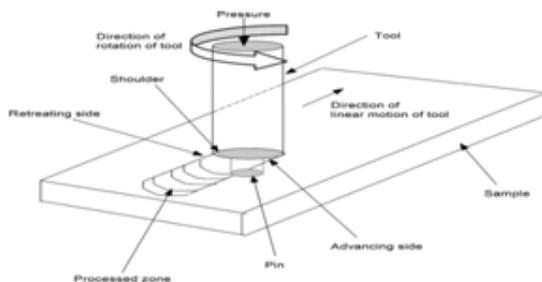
Motion of Tool in Friction Stir Processing [1]
